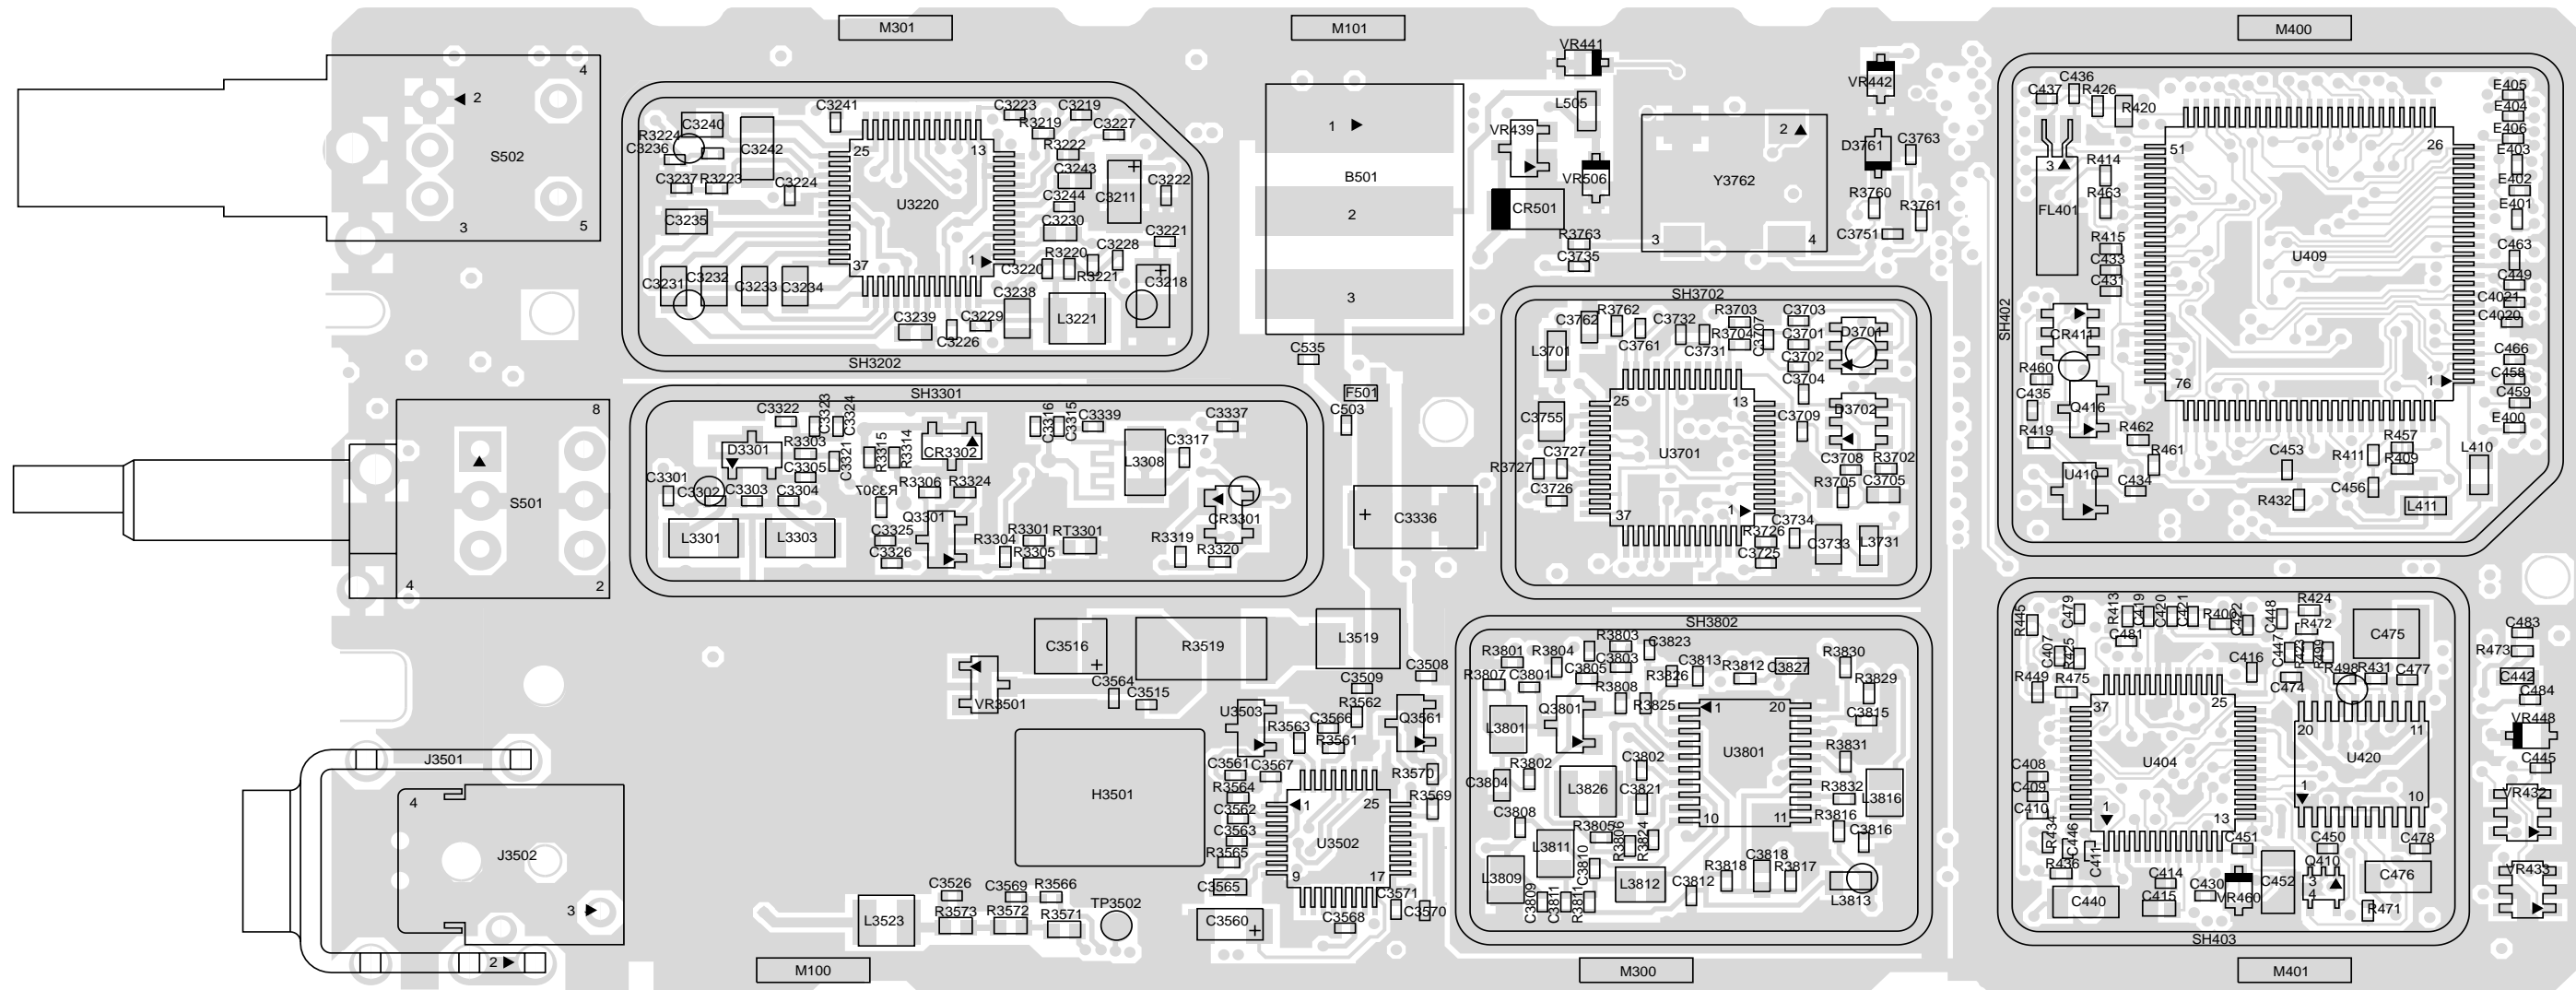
VHF (136-174 MHz) 5000/7000 Series Main Board Bottom Side PCB 8486062B16
